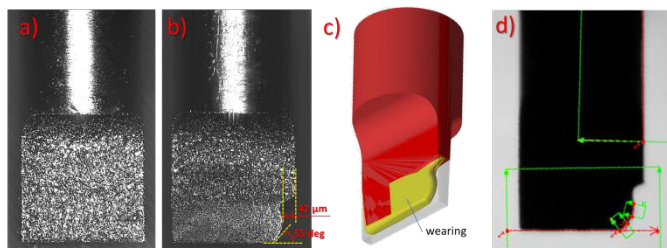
Electrode tool (a) before and (b) after the machining and (c) 3D reconstruction of tool wear, (d) framework of automated image processing.
